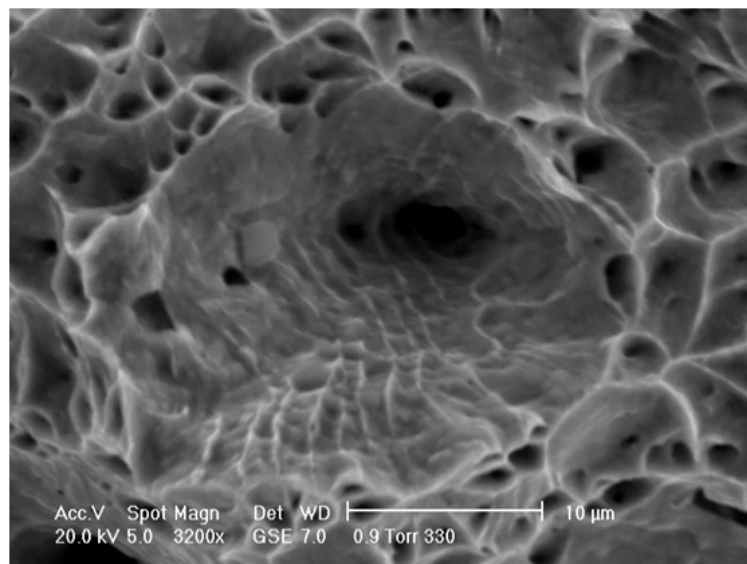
Detail of the macrovoids in the fracture surface of steel C.
